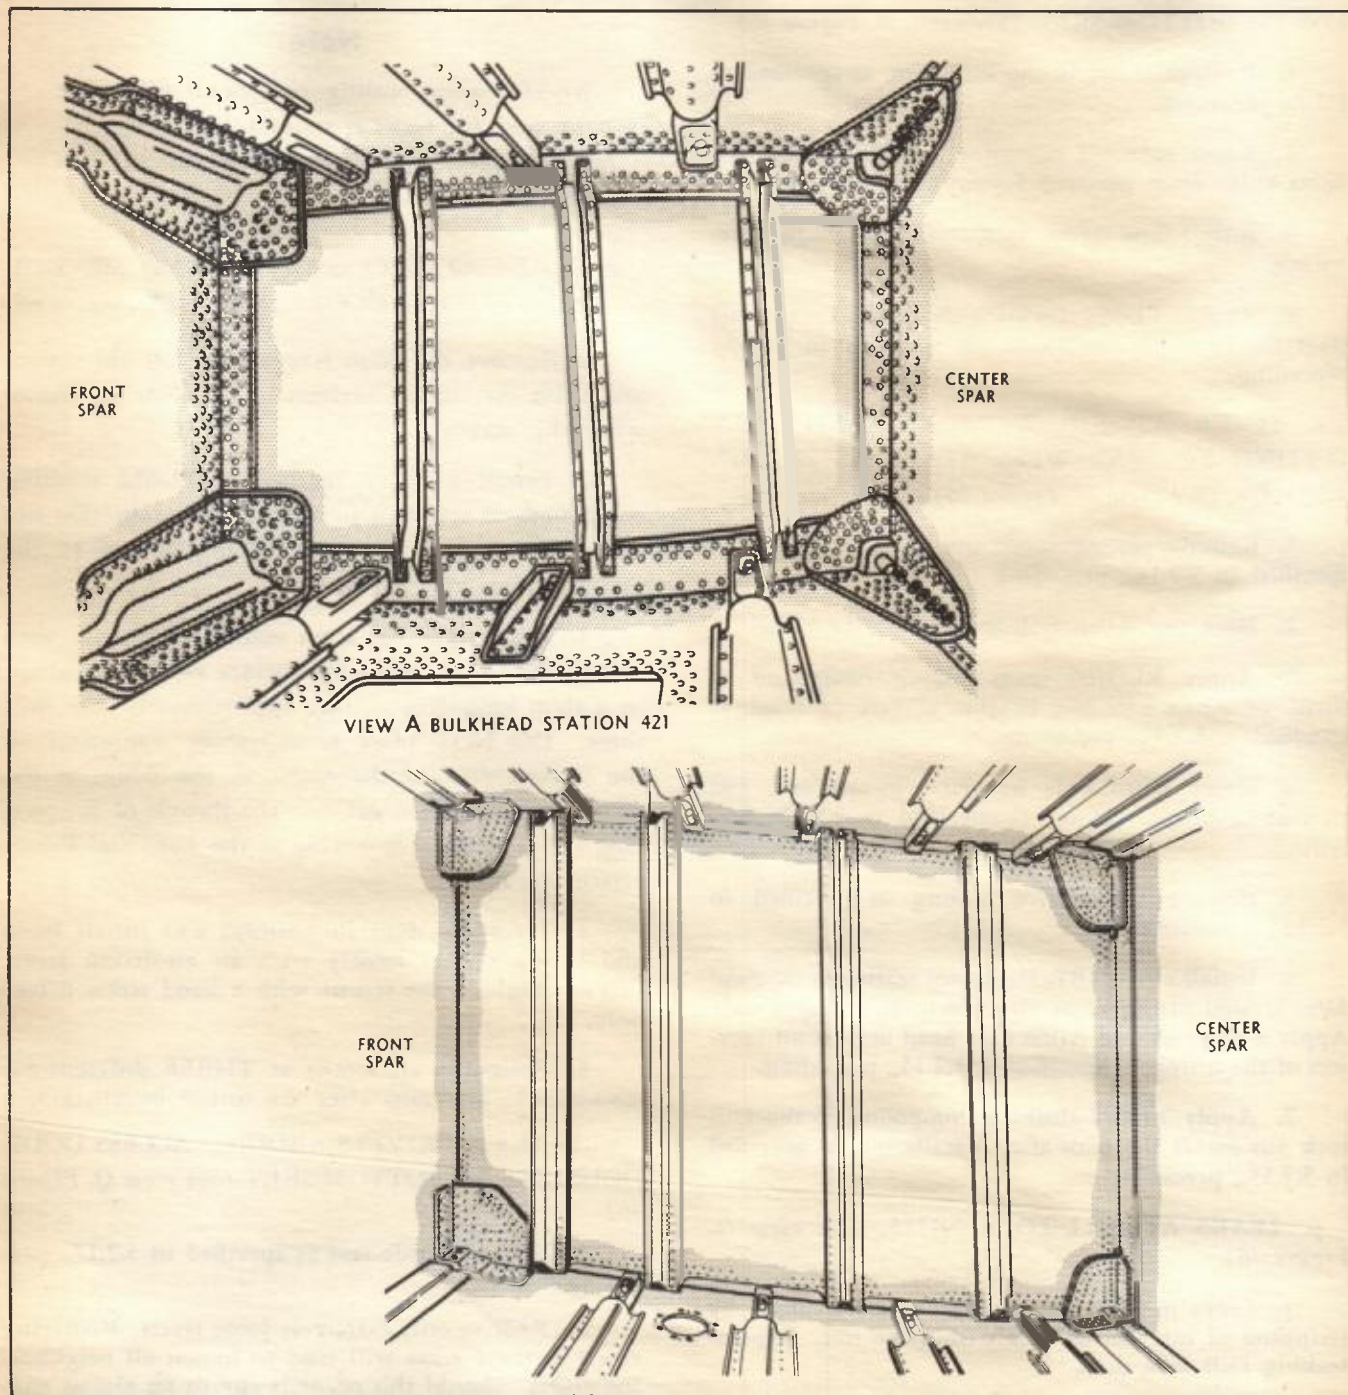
(Sheet 1 of 6 Sheets) — Fuel Tanks — Possible Leakage Areas
